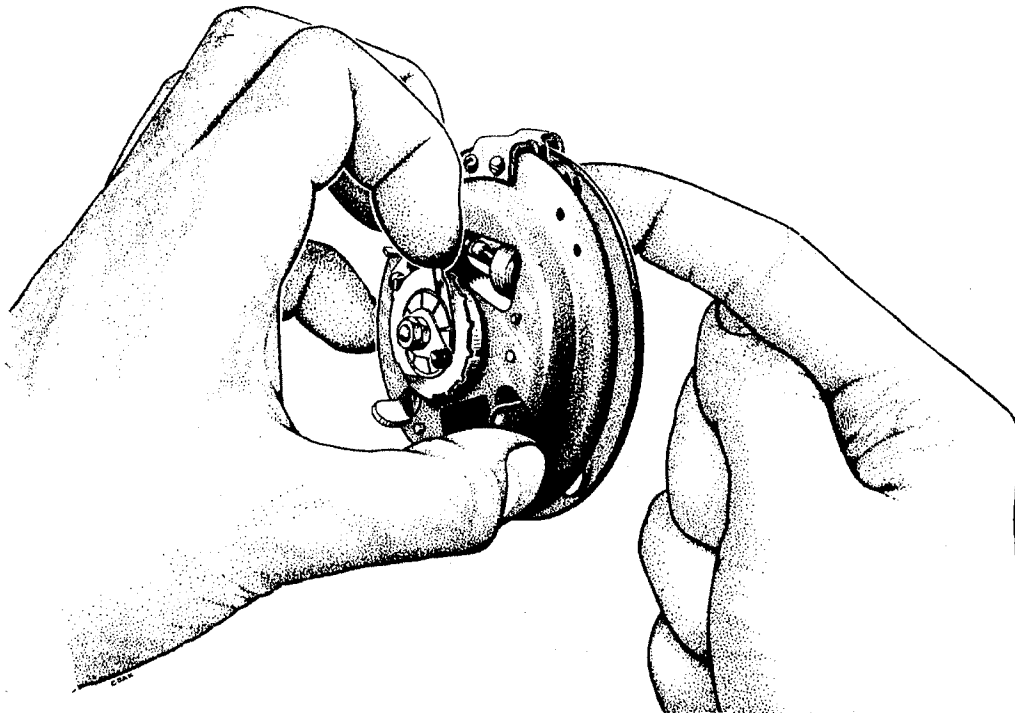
REDUCING THE TENSION OF THE SPRING WASHER
